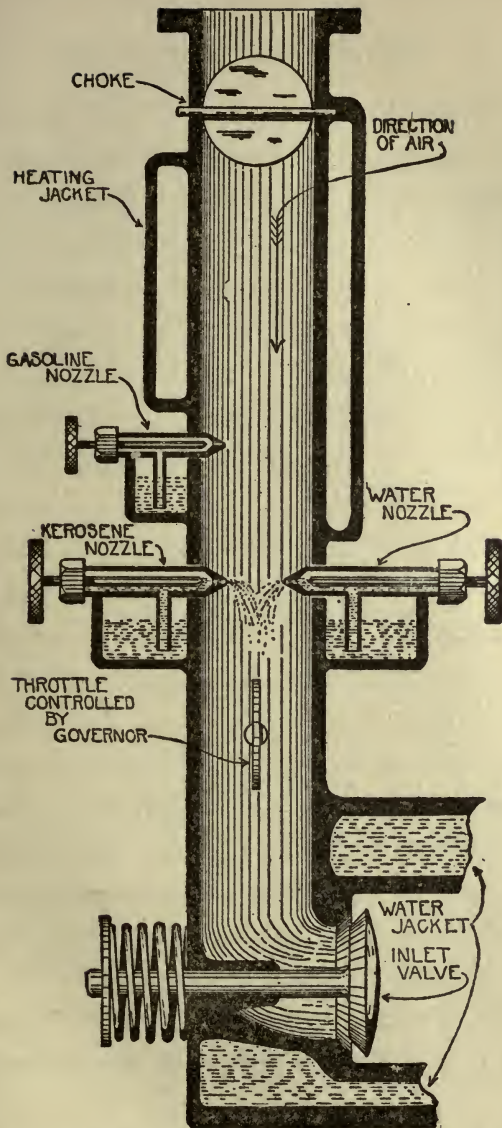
PUMP-FED CARBURETOR WITH TWO FUEL NOZZLES
